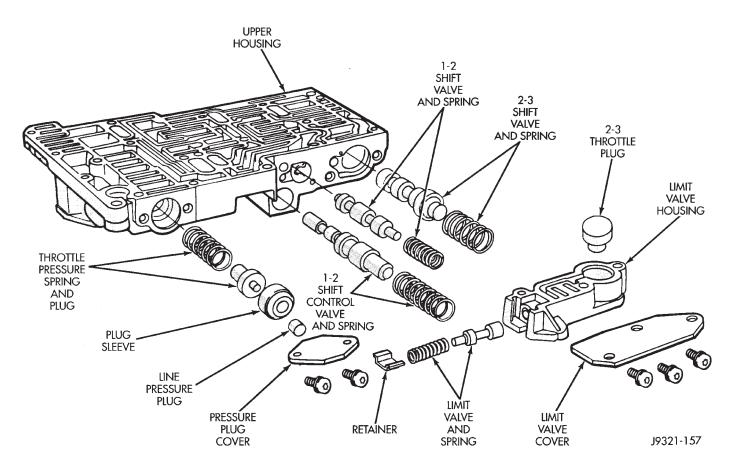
Upper Housing Shift Valve And Pressure Plug Locations
